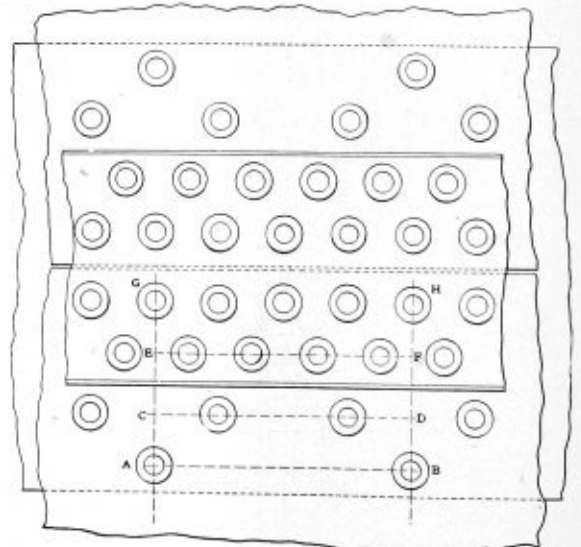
QUADRUPLE-RIVETED JOINT.
